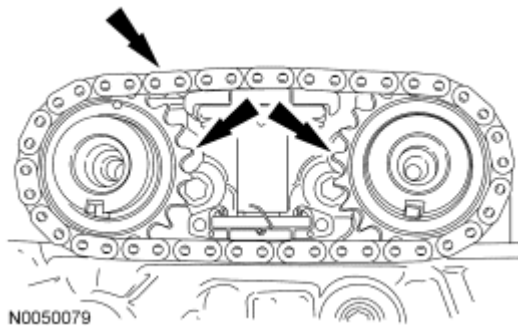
Identifying Timing Chain & Camshaft Sprockets
